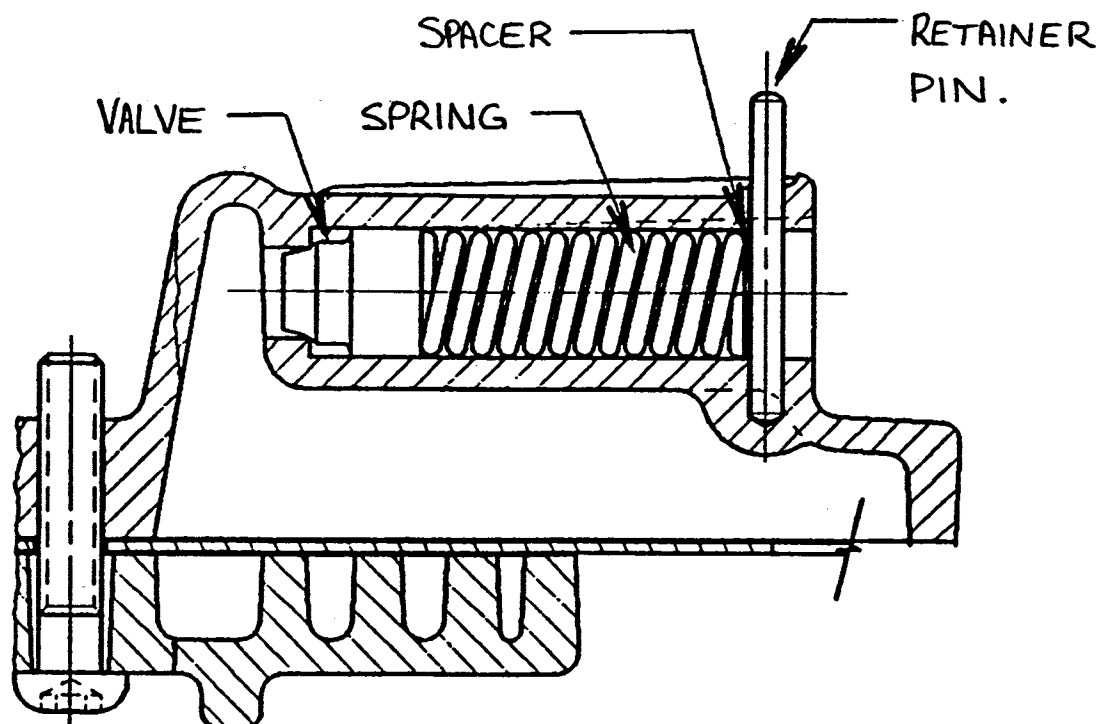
LINE RELIEF VALVE ASSEMBLY.
